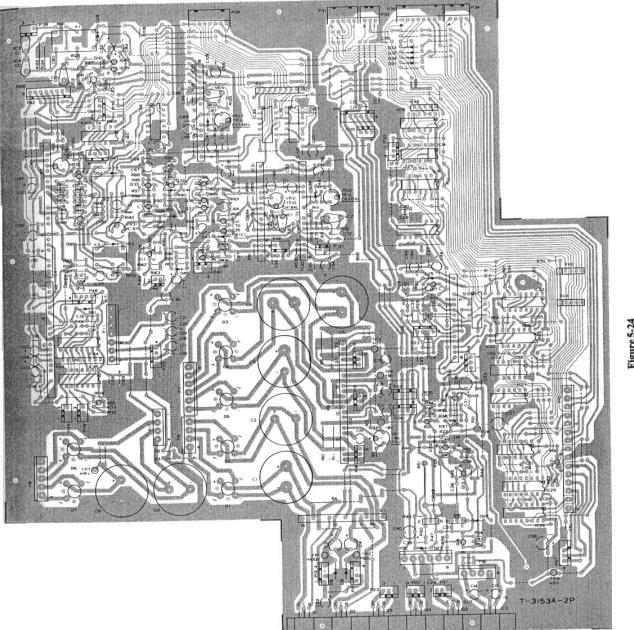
LBO-516 Main P.C. Board T-3153A
